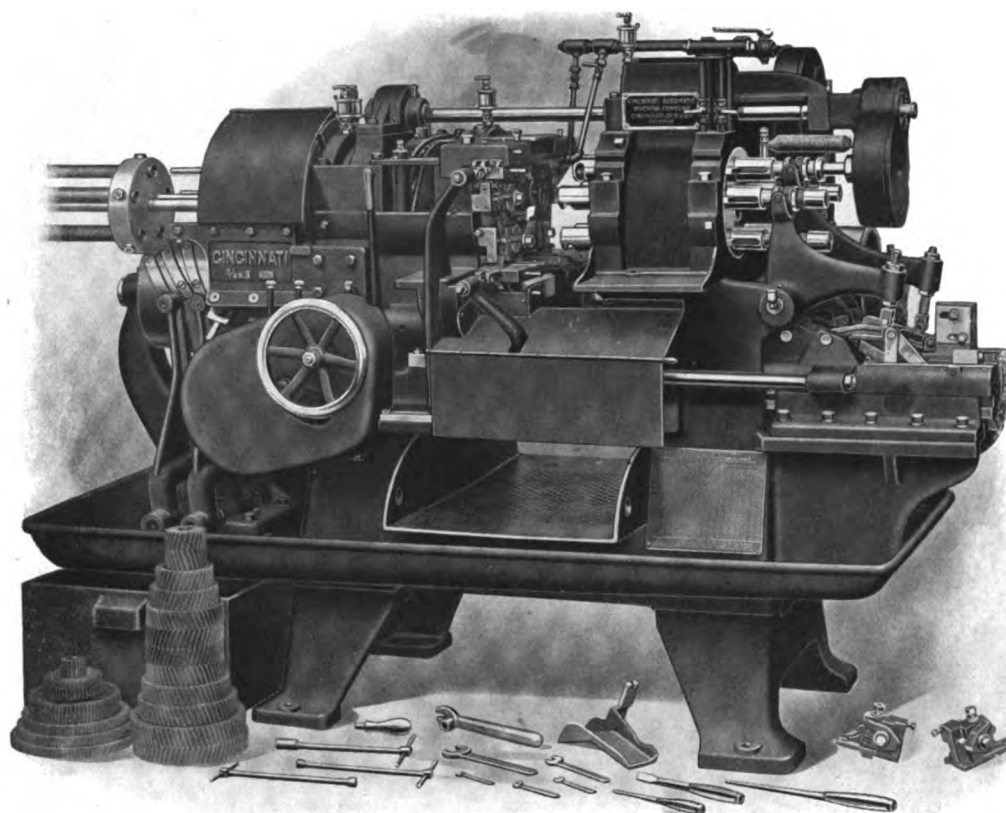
Front View of Cincinnati $\frac{3}{4}$ x 3" Five Spindle Screw Machine
